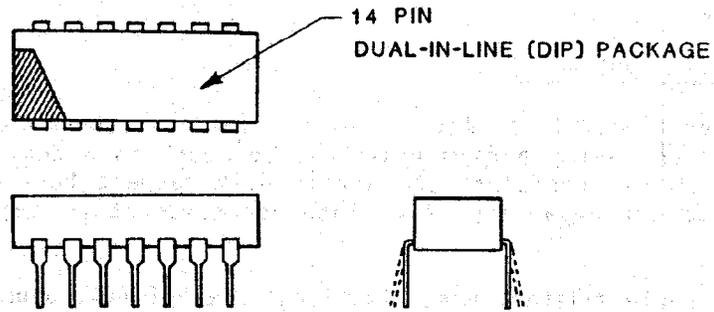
Outline drawing of a style RZ010 package configuration.
